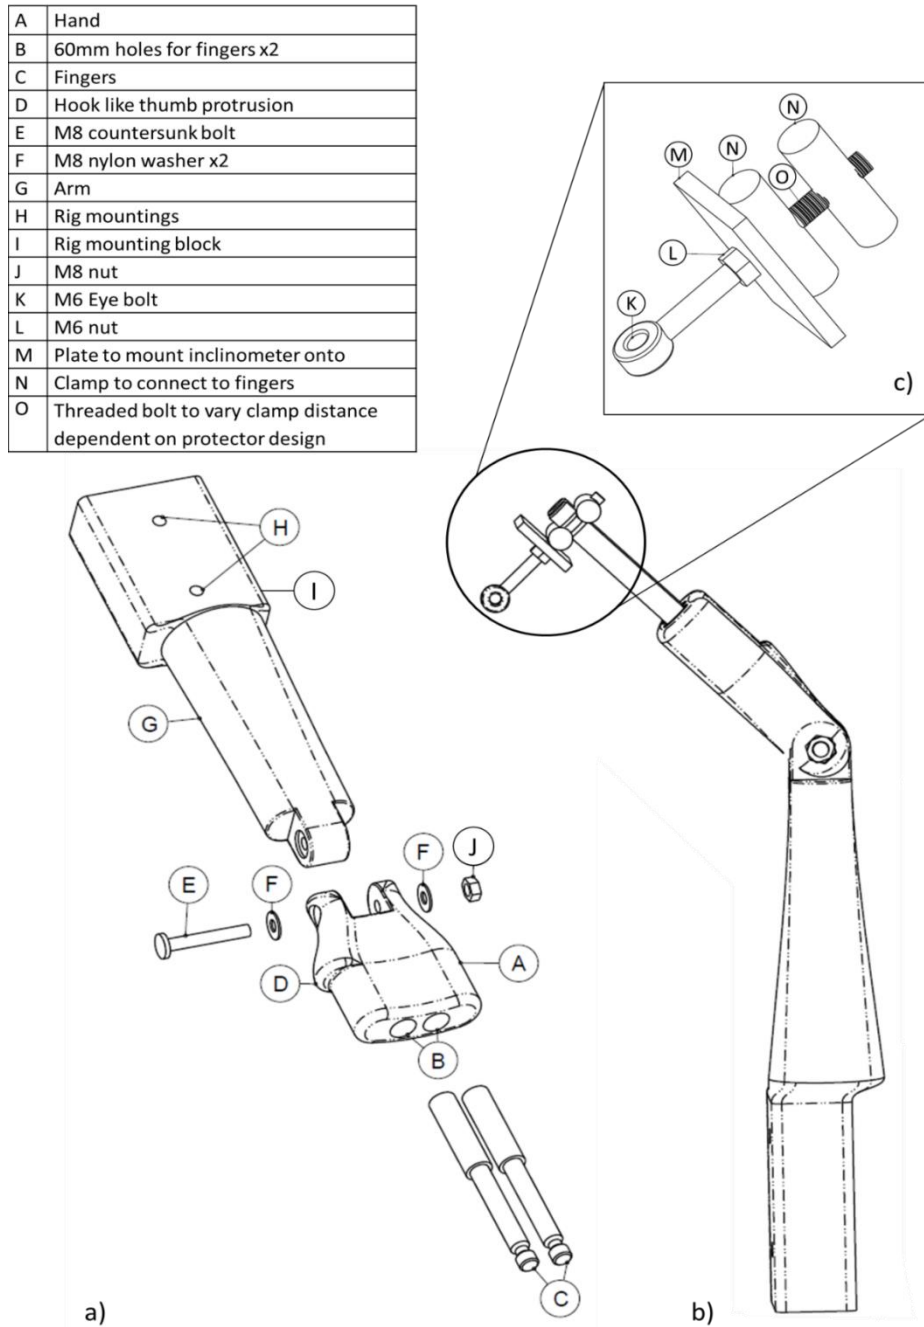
a) Exploded view of geometric surrogate b) External clamp mounted to surrogate fingers c) Detailed view of clamp
